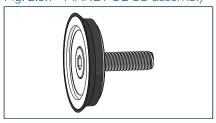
MANET GL CS countersunk assembly 5/16" - 1/2" glass hardware
